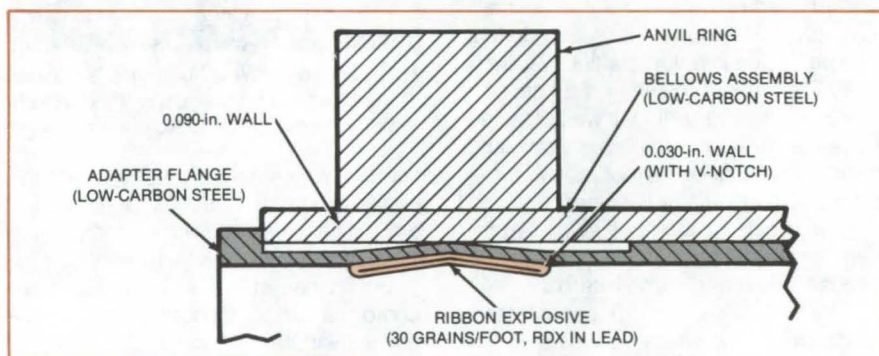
A Ribbon Explosive drives V-notched adapter flange into the bellows assembly.
